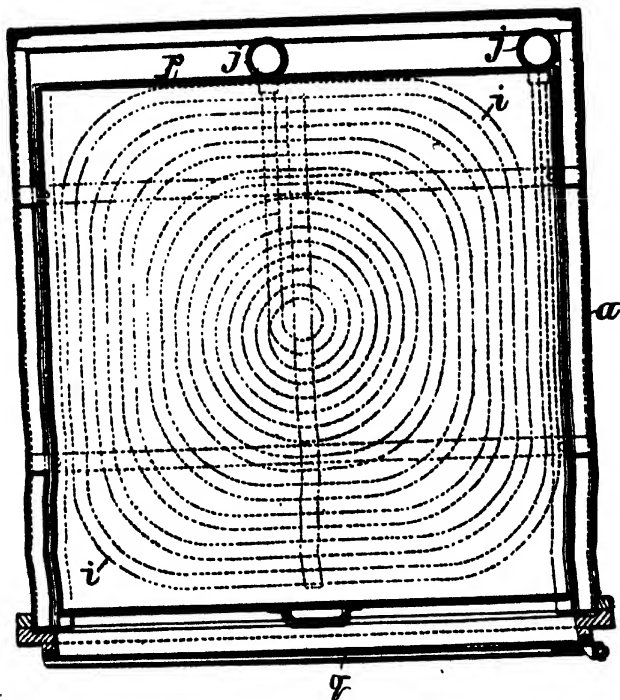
Steam-heated Vacuum Tea Drying Machine, with Sliding Shelves or Trays (horizontal section).
